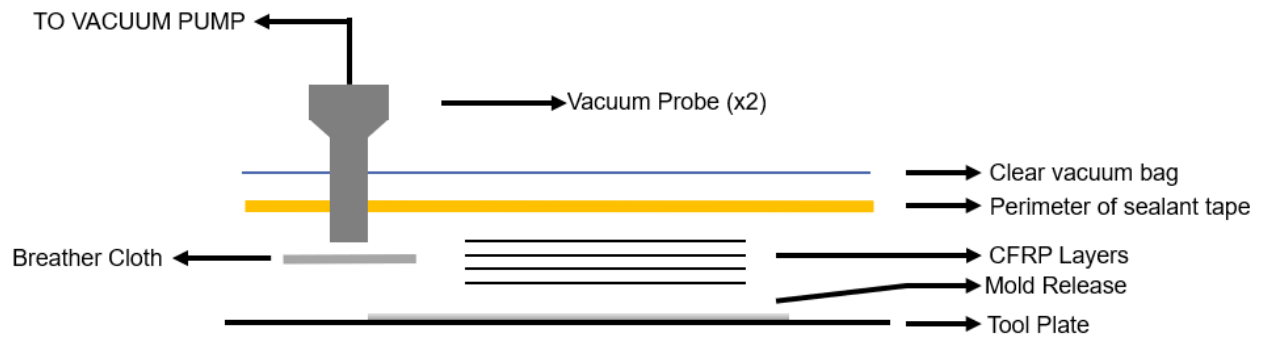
Exploded view of a sample ready to be placed in an autoclave.
